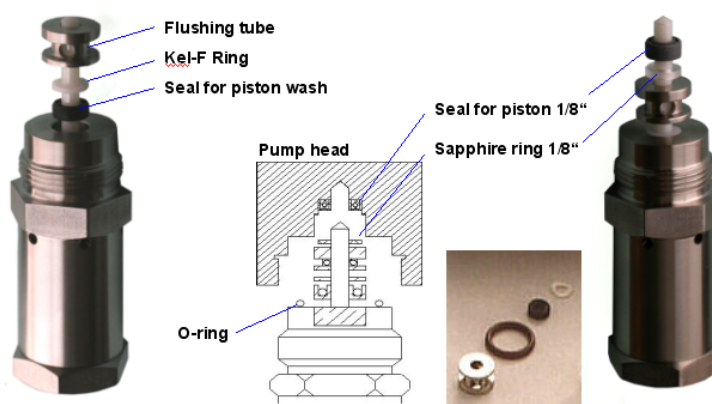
Piston cartridge and piston wash assembly, analytical.
